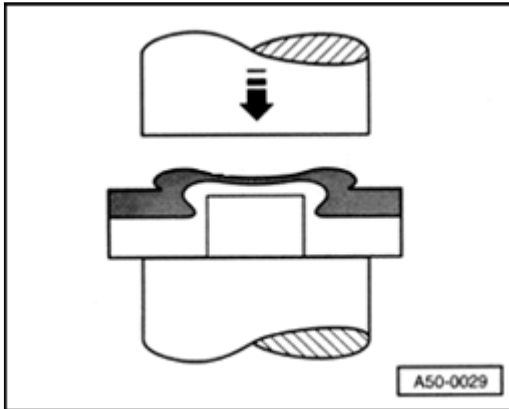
Pressing Back Clinch Point With Rivet Tool
